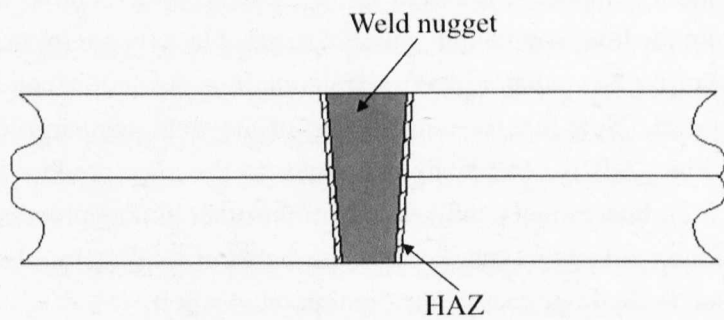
Illustration of the spot weld made by laser welding
